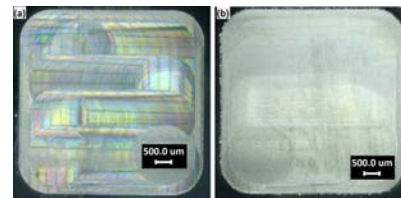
Machining of $10\ \text{mm}\times 10\ \text{mm}$ area using a fine patterned planarization tool at (a) 70% radial Immersion (b) 5% radial immersion
